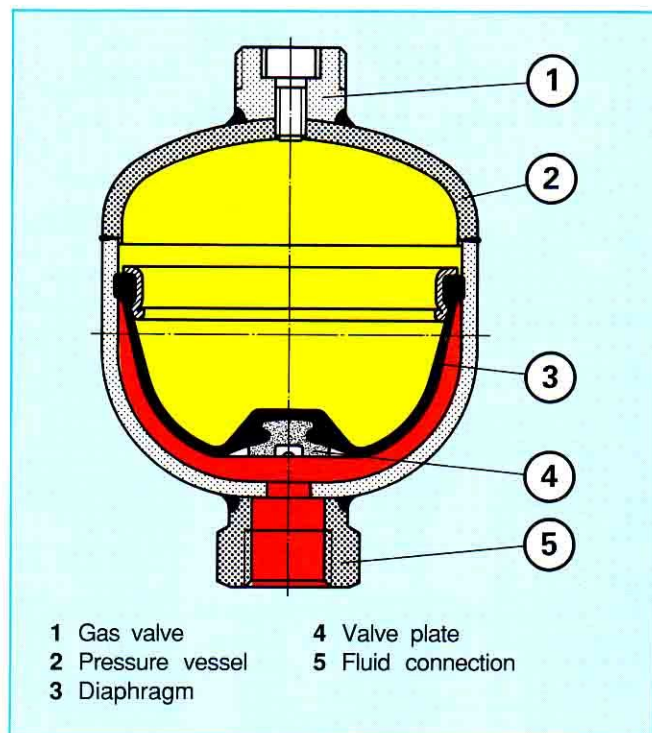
Diaphragm-type accumulator, welded version
